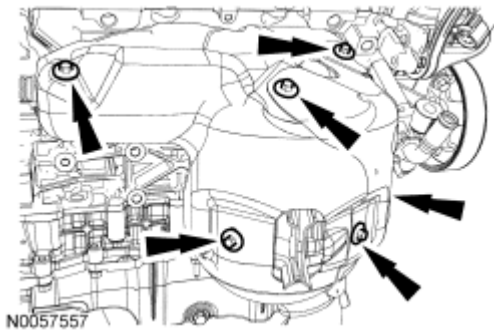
Locating RH Exhaust Heat Shield Bolts
